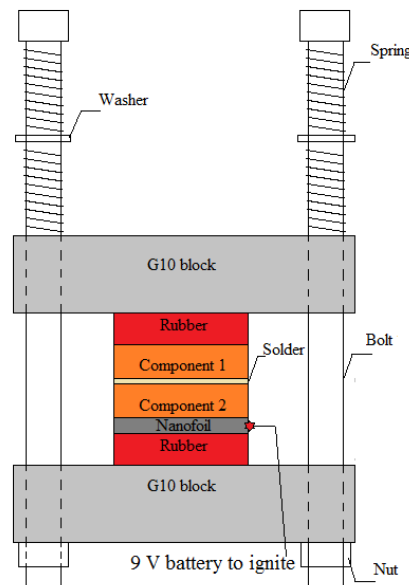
The schematic drawing of nano-heater joint manufacturing installment.
